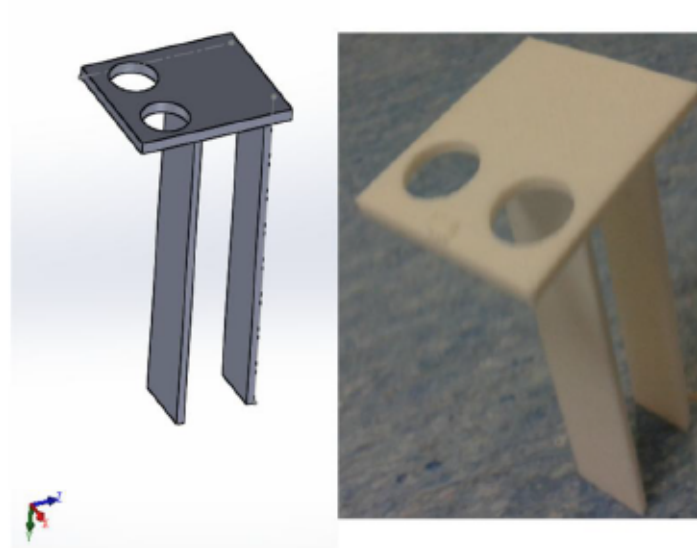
SolidWorks caption of the designed support piece for the US sensor (left), and the 3D printed PLA piece (right).
